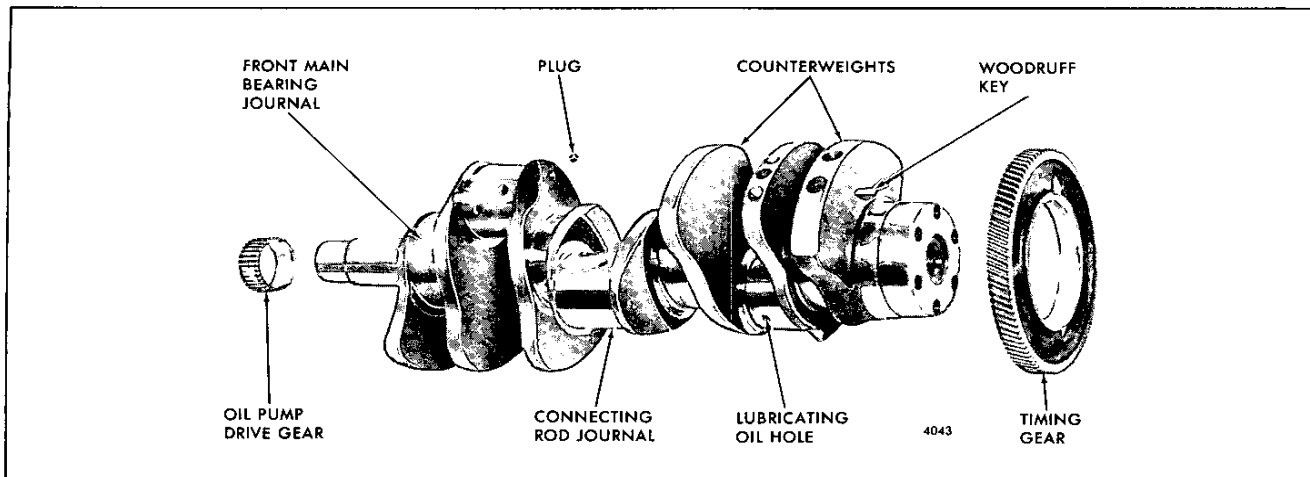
Crankshaft Details and Relative Location of Parts (6V Crankshaft Shown)
